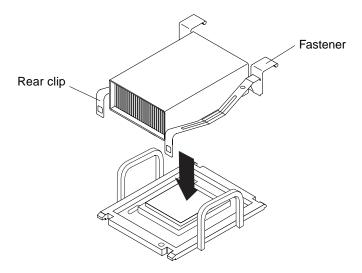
Replacing the Heat Sink on the CPU Socket
